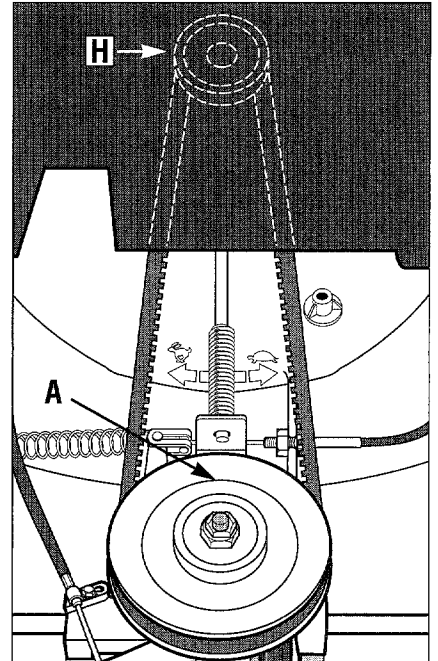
Press down on rear of pulley (A) to install or remove belt.
